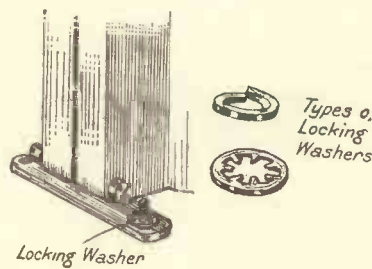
WHEN BOLTING HEAVY COMPONENTS TO PANELS IT IS WELL WORTH WHILE TO USE LOCK-WASHERS.
